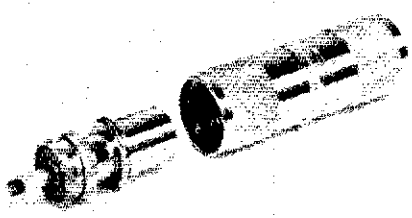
An elongated PL-259 can be made by soldering the sleeve portions of two connectors together as shown above. The elongated sleeve enables the operator to obtain better leverage when installing or removing a coaxial cable.
